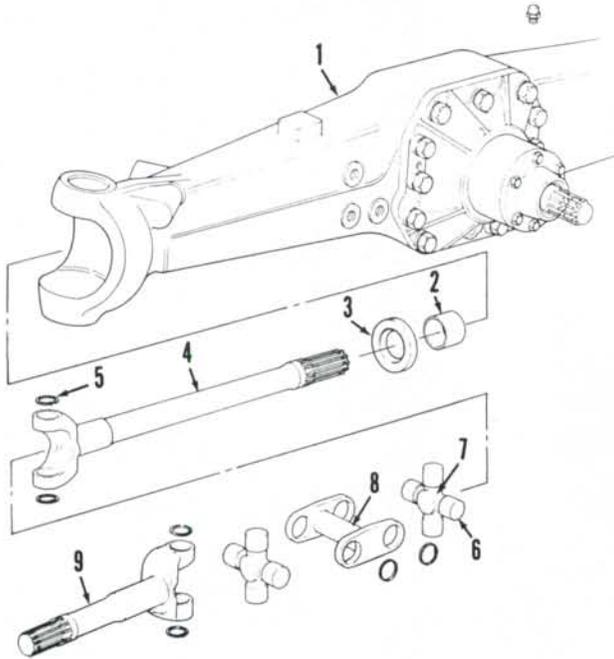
Exploded view of typical axle shafts used on Carraro 709/19 axle.
